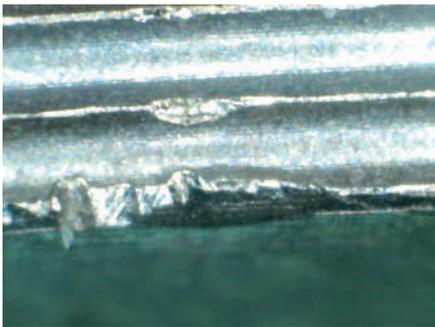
Mechanical damage in a screw caused by automated reprocessing
